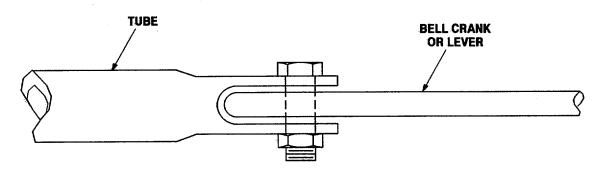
Control Rod with Bearing and Clevis Assemblies (Sheet 2 of 2)
